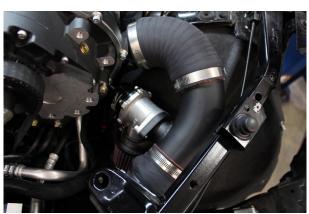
f: Attach 90° Silicone Elbow & Discharge Tube "A"
